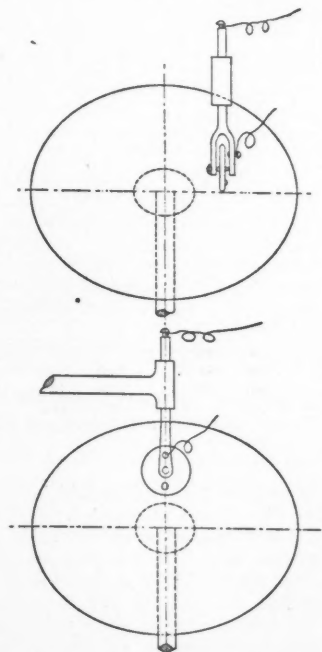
Sketch Illustrating Construction of Mechanical Integrator for C., B. & Q. R. R. Dynamometer Car.
